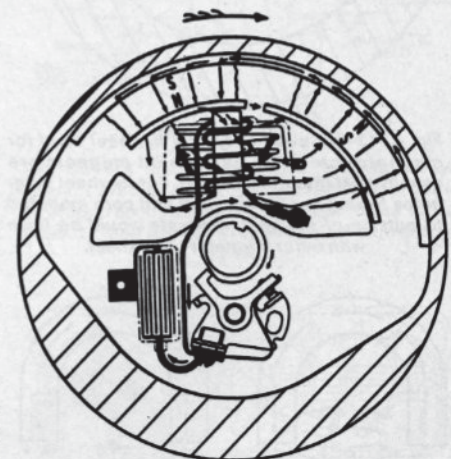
The flywheel magnets have now turned slightly past position shown in Fig. CS21 and rate of movement of lines of magnetic force cutting through coil windings is at maximum. At this instant, the breaker points are opened by the cam and flow of current in primary circuit is being absorbed by the condenser, bringing flow of current to a quick, controlled stop. Refer now to Fig. CS23.
